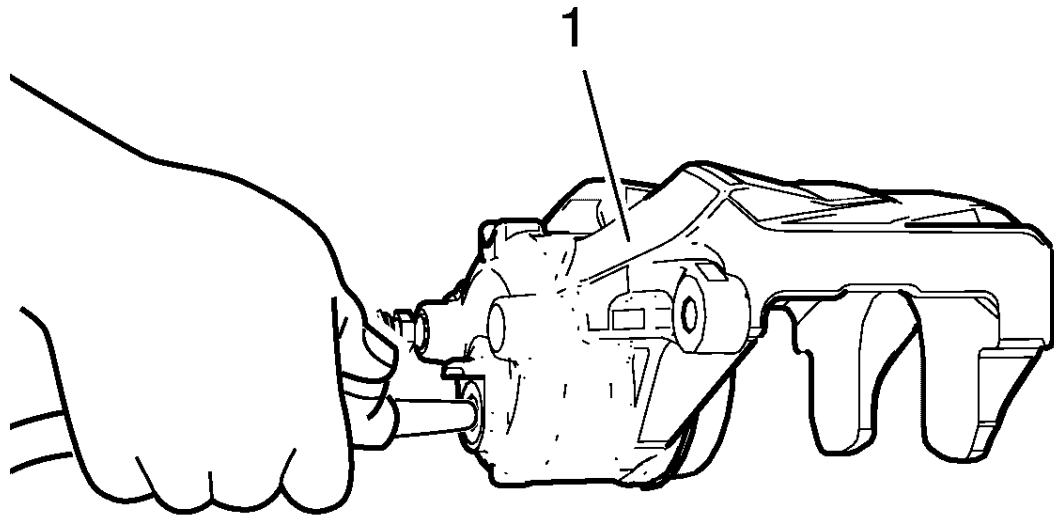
Using Low Pressure Compressed Air To Remove Brake Caliper Piston
